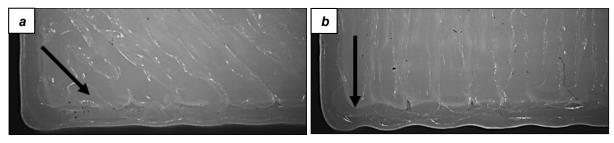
Top views of the printed parts: a) part printed vertically b) part built at 45° offset
